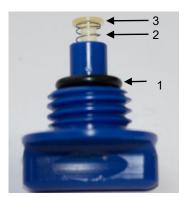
Drain valve with O-ring (1), compression spring (2) and valve plug (3)
